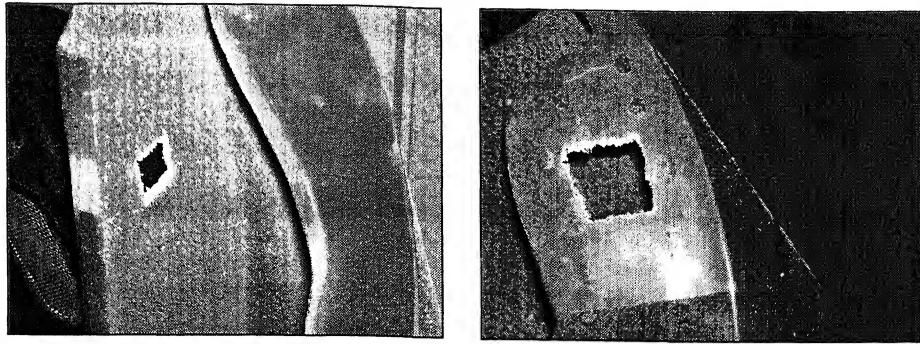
Cutout sections of material samples from the inner flanges of the panel.
